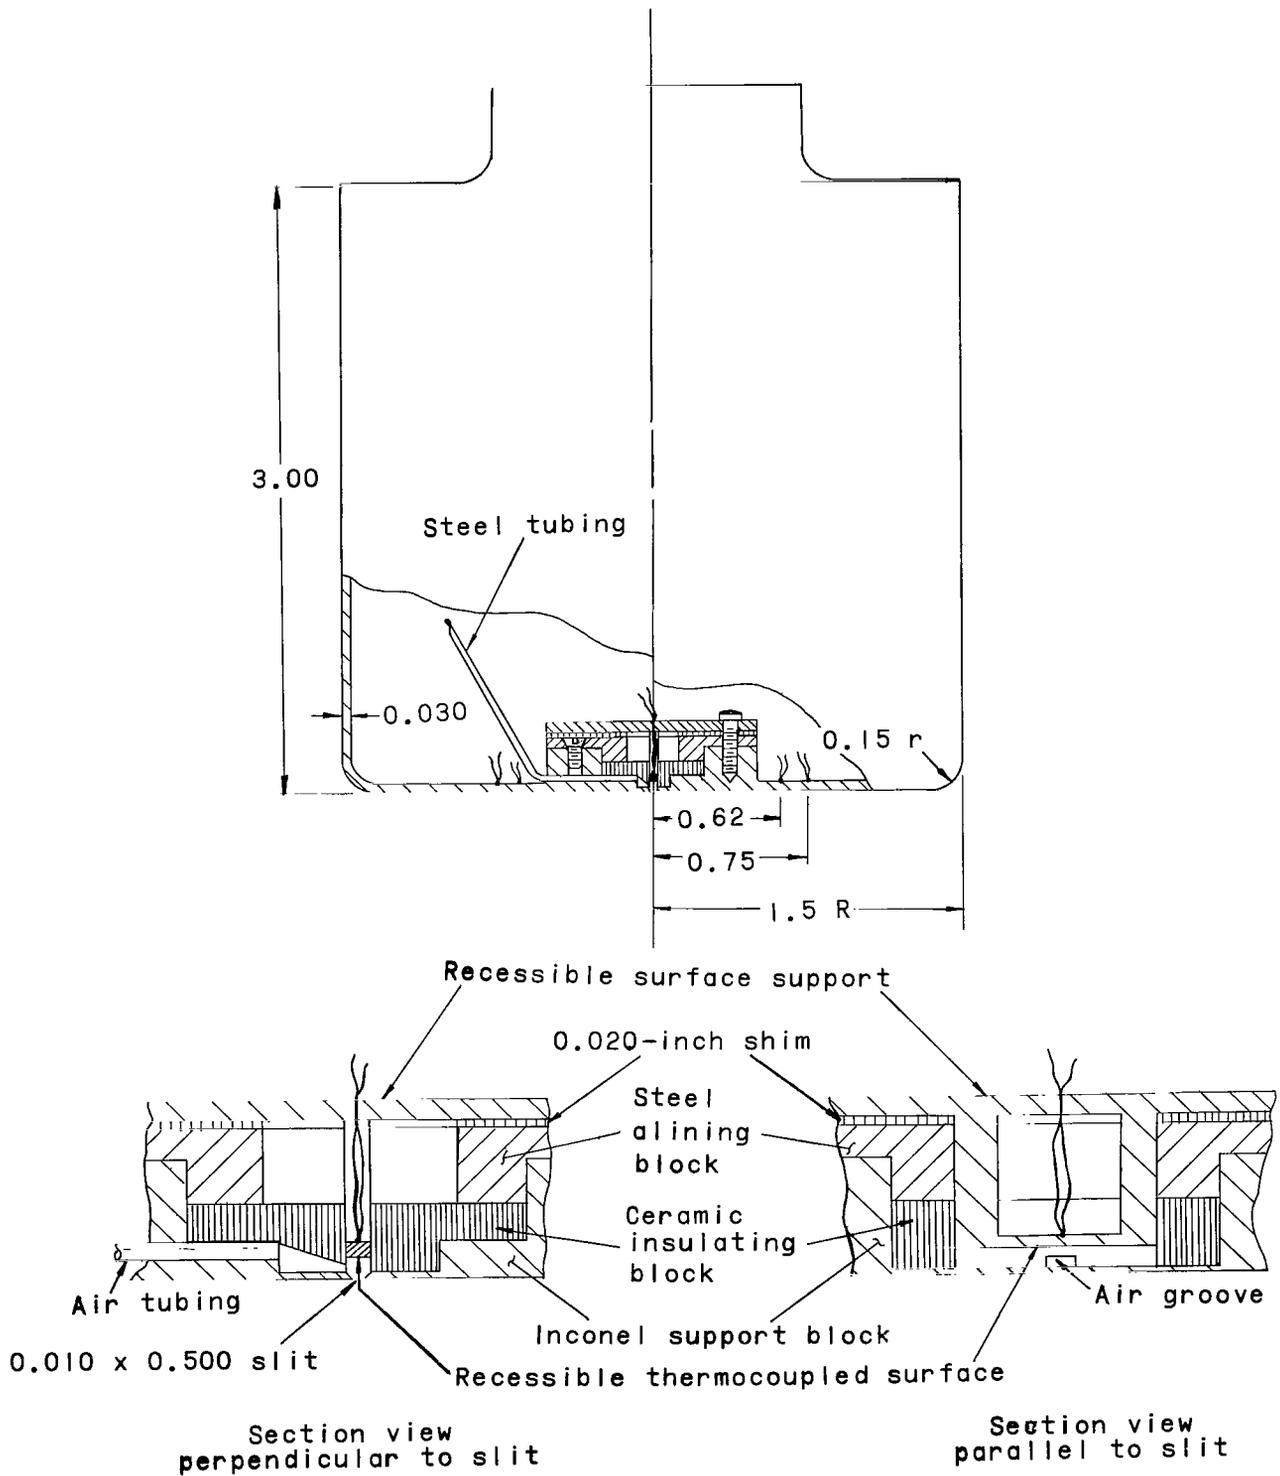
Assembly and detail of test configuration. All dimensions are in inches.
